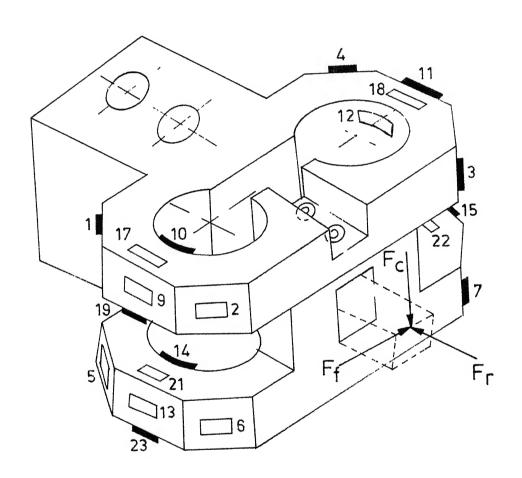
THREE COMPONENT LATHE TOOL DYNAMOMETER.
